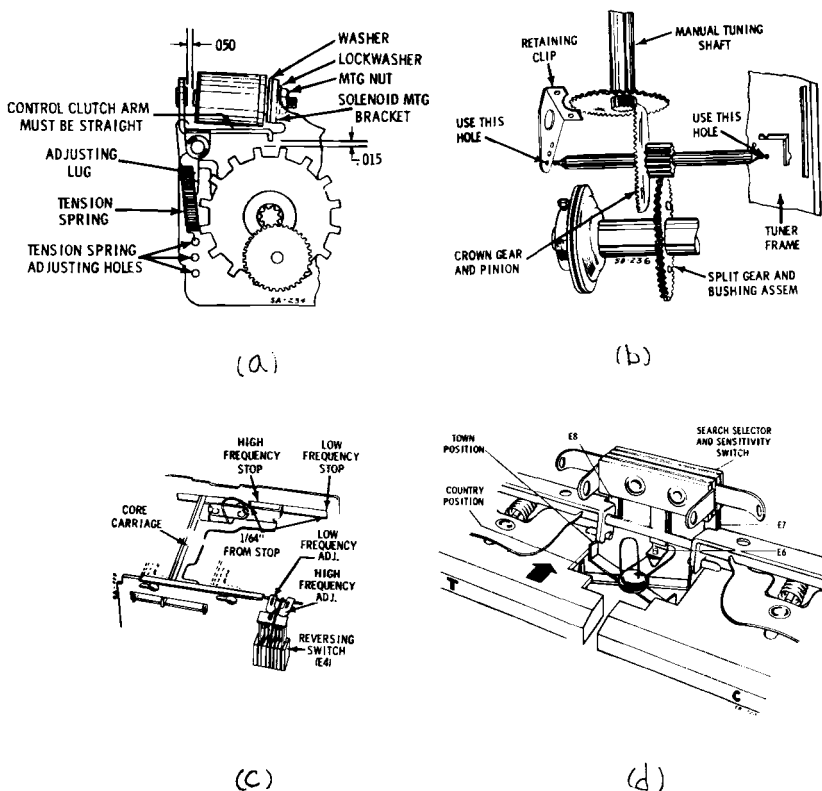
Further mechanical details... (a) control clutch adjustment, (b) crown gear engagement, (c) reversing switch adjustment, and (d) switch operation.
